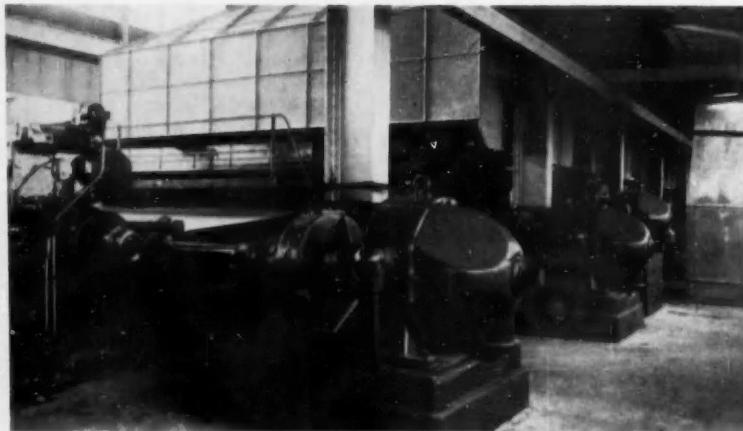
Pilot-generator speed-matching equipment on a paper machine.
